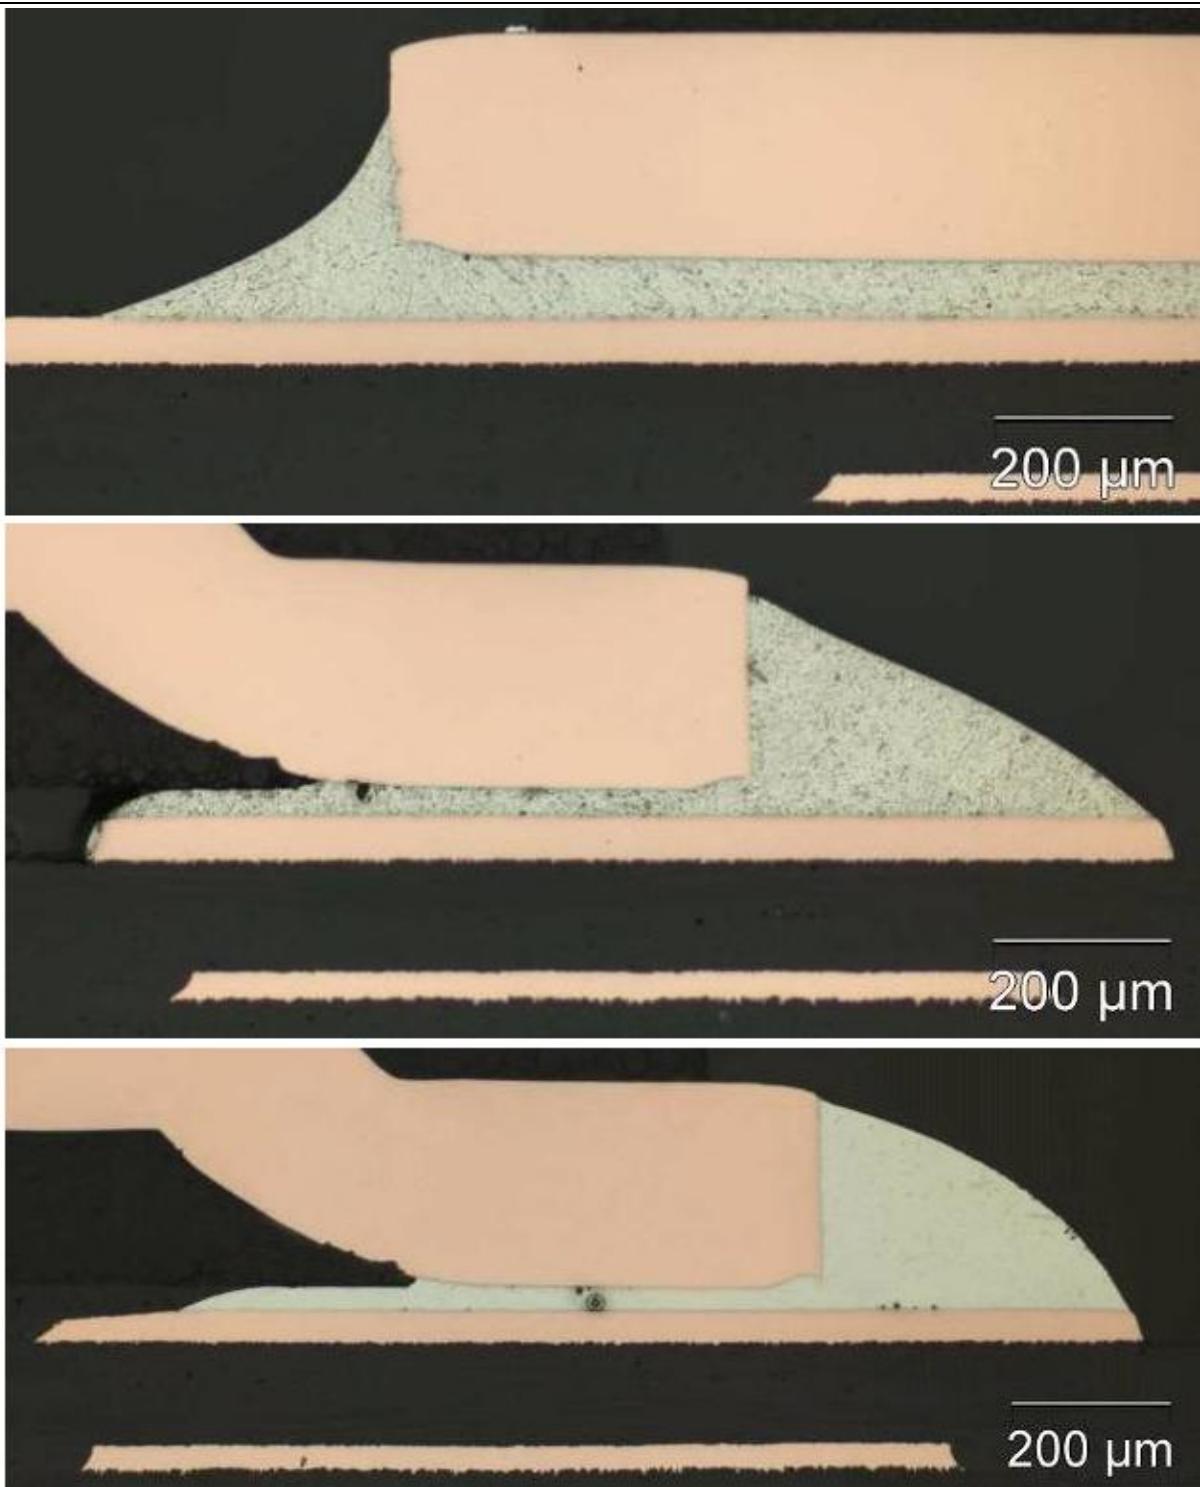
Cross-section views of mounted TDSon-8 packages. The first photo shows a SnPb solder joint of the drain pad. The second and third photos show source/gate solder joints with SnPb, and SnAgCu alloys, respectively.
